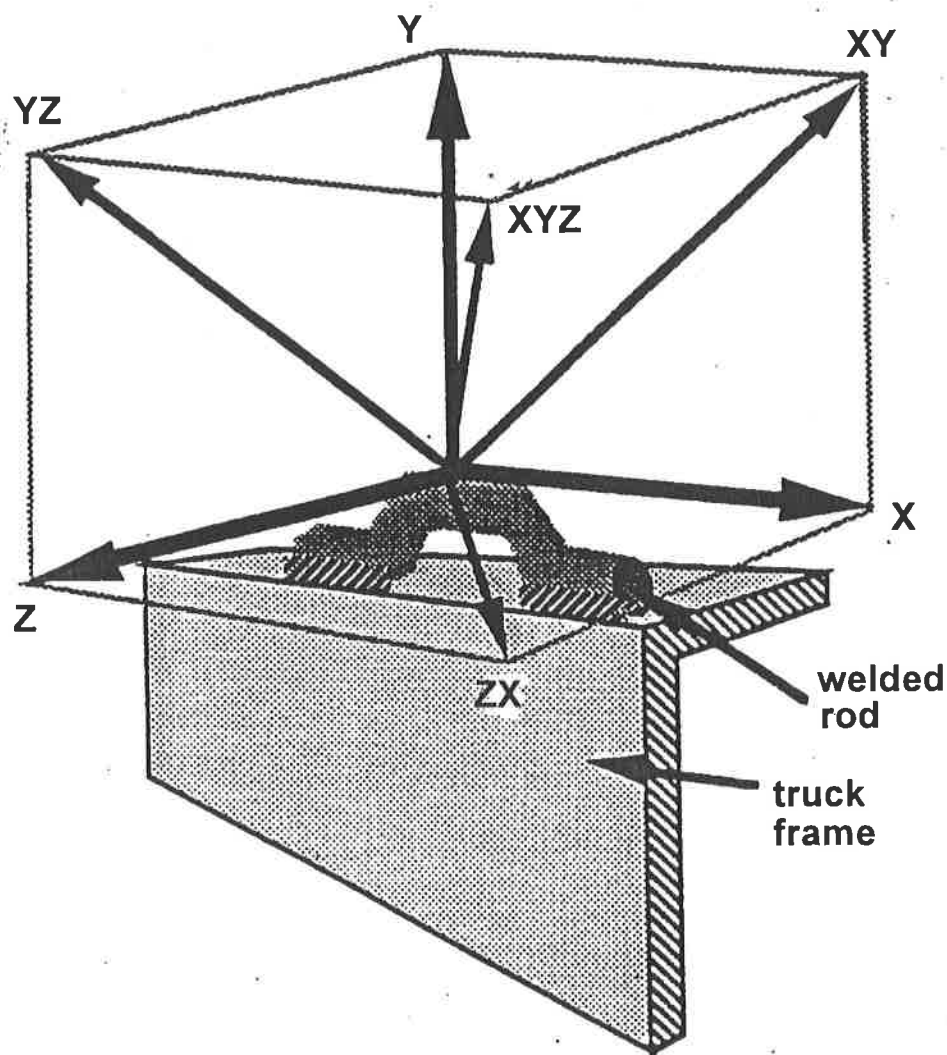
Loading Directions for Welded Rod Tests
